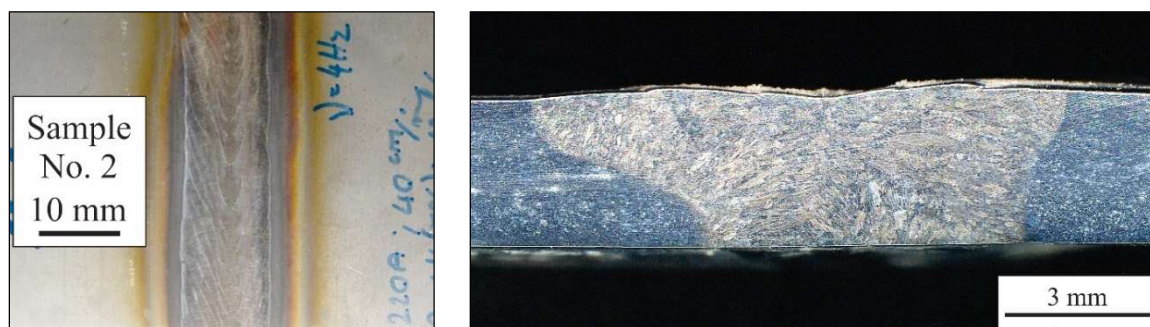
Specimen N° 2 - TAG, 220 A, no filler material
